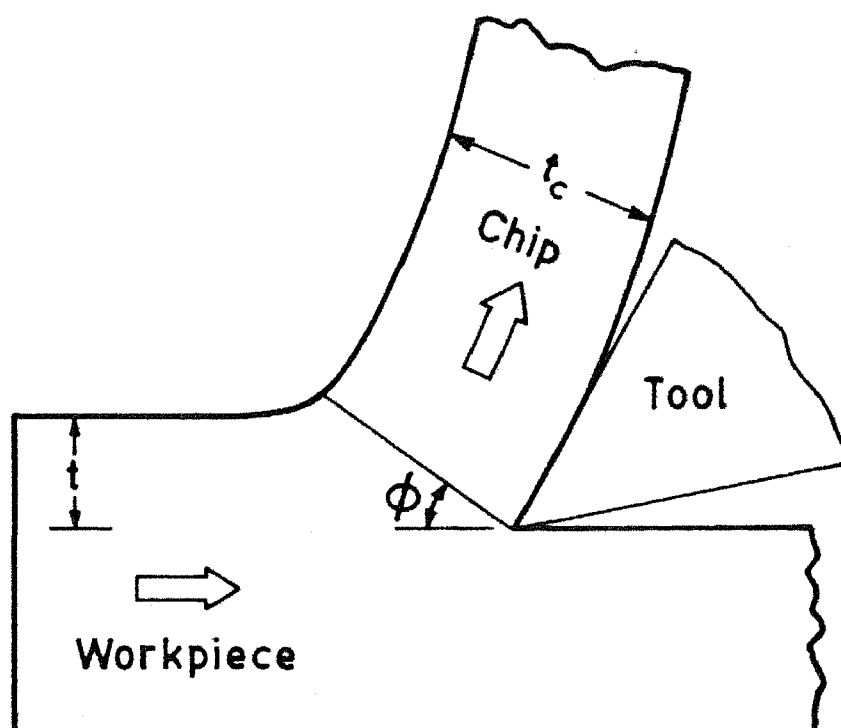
Geometry of Chip Formation in Orthogonal Cutting.
